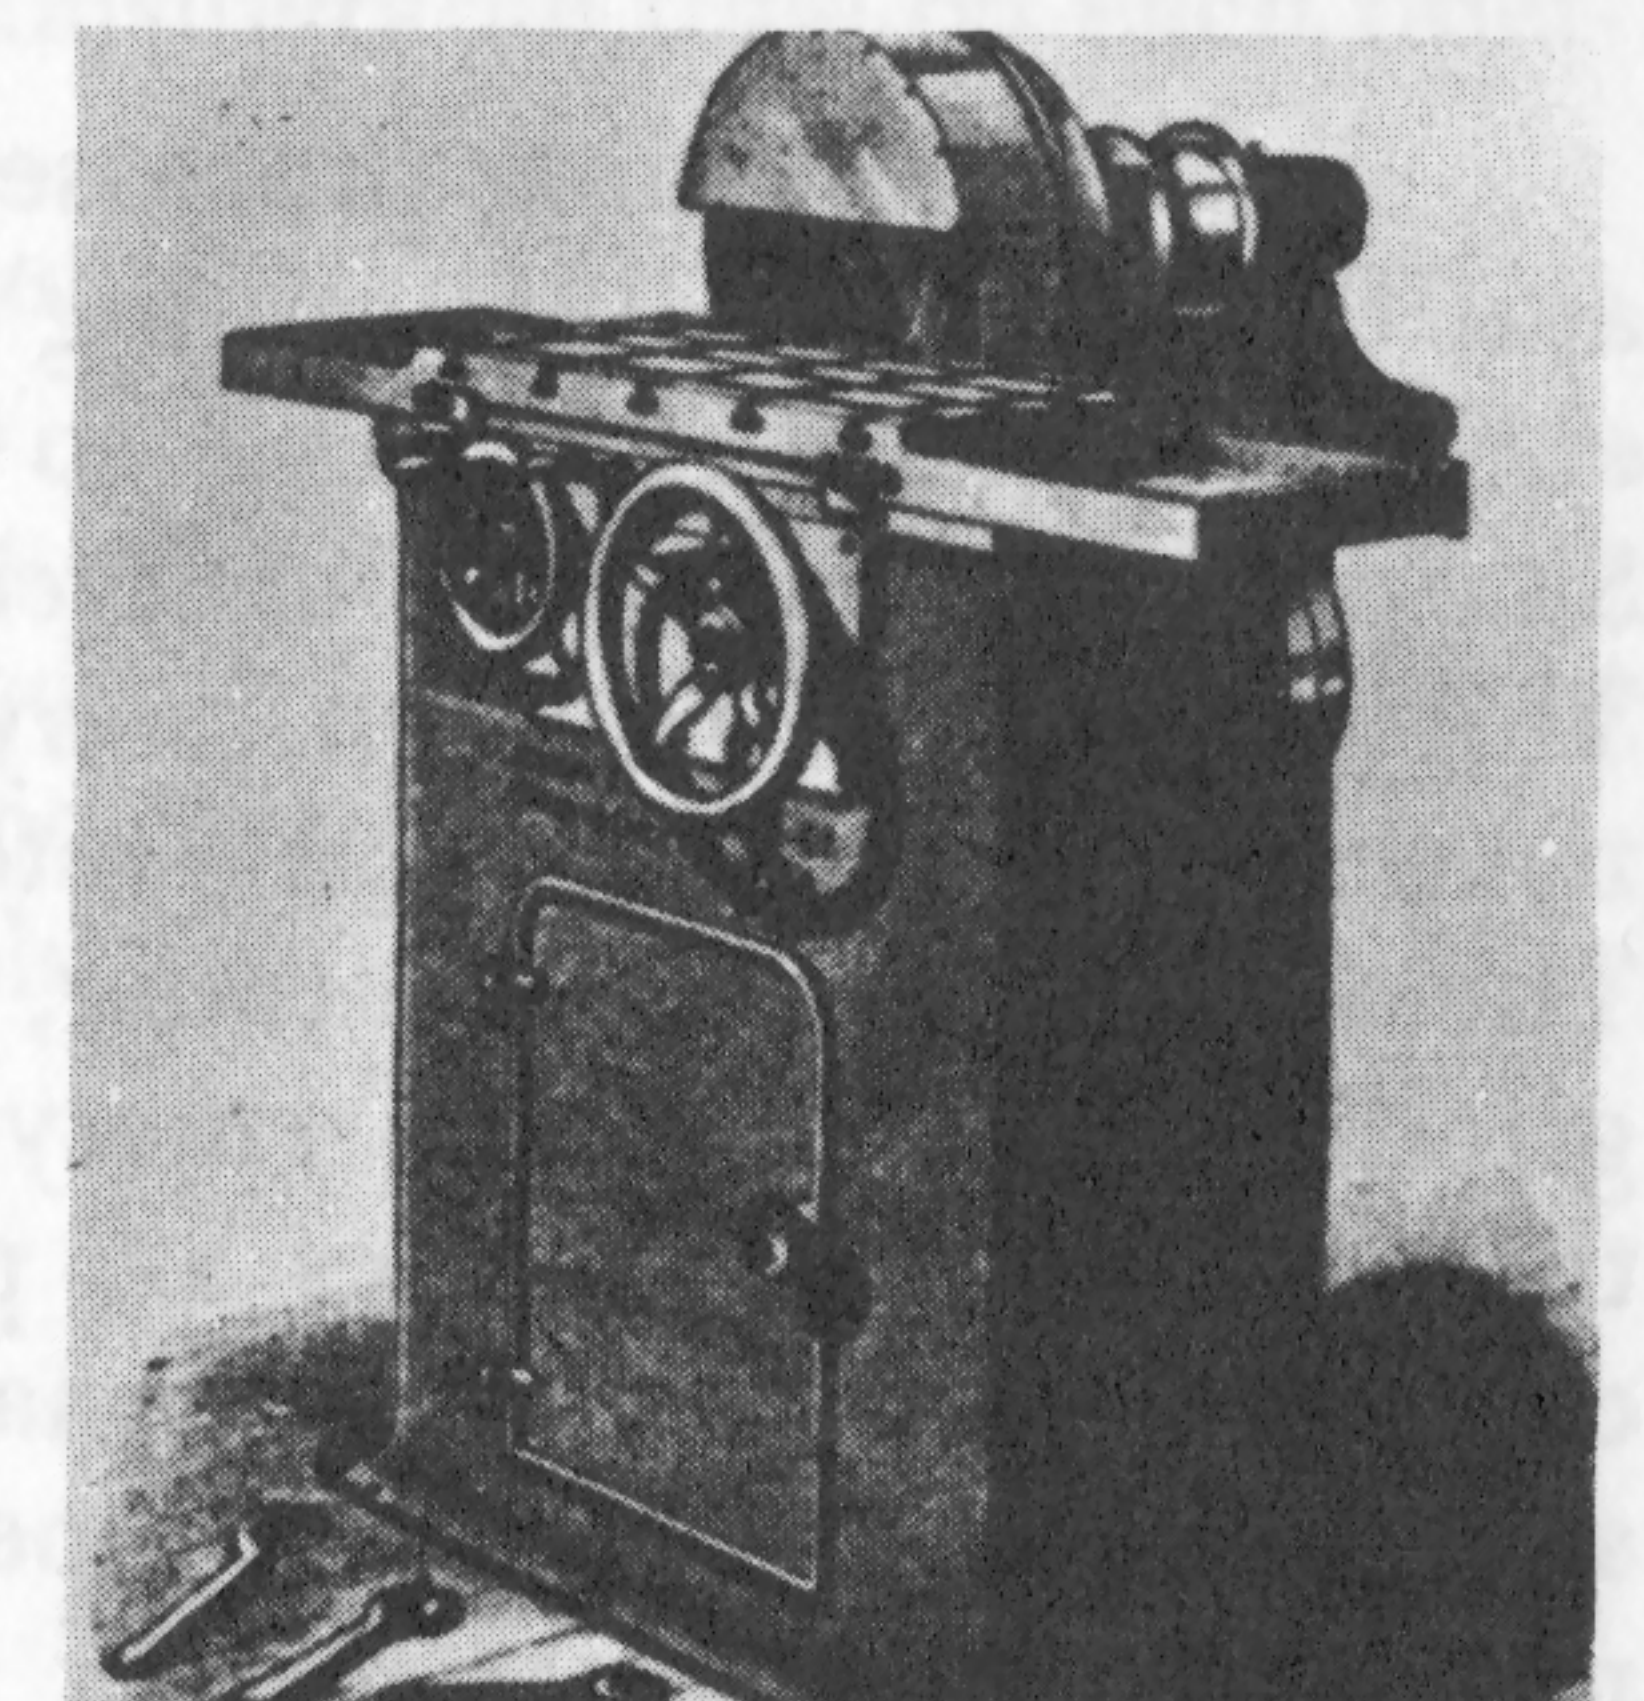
D FACE TYPE SURFACE GRINDING MACHINE, 1885
